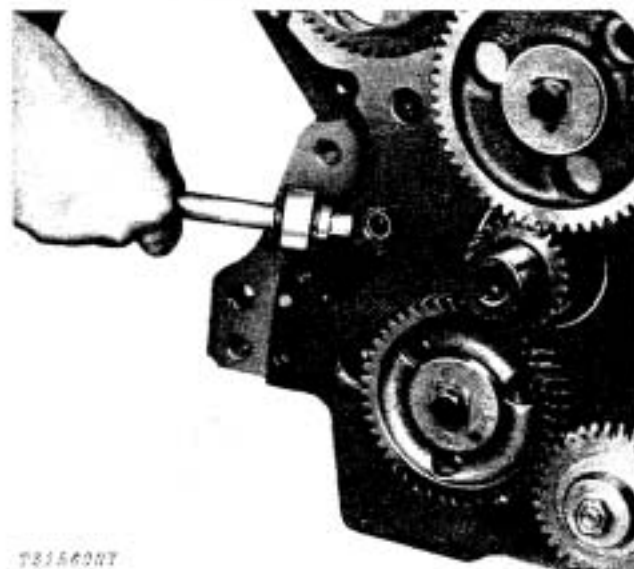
Installing Pressure Regulating Valve Bushing with JD-248-A Driver
